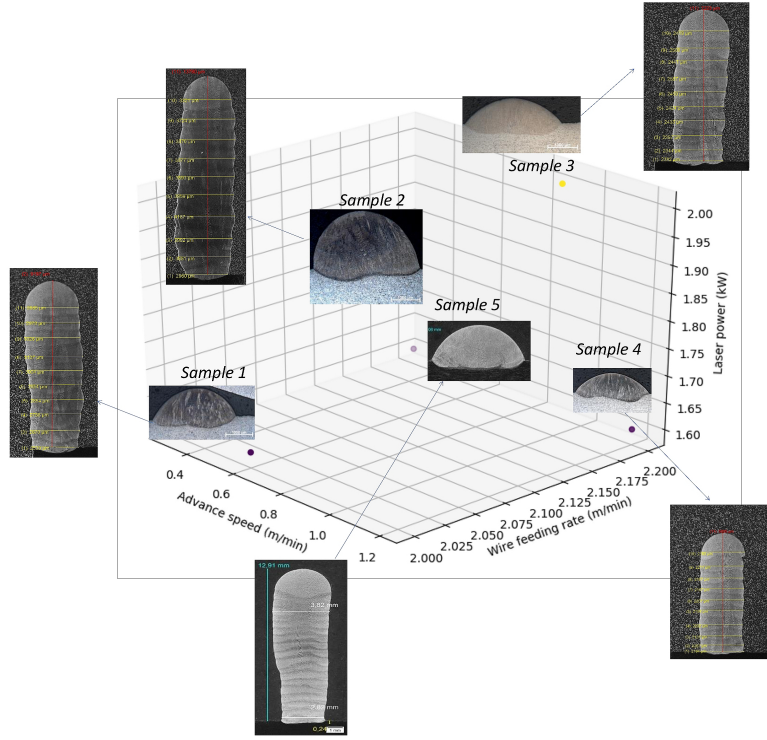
Bead geometry samples. source: Institut de Soudure
